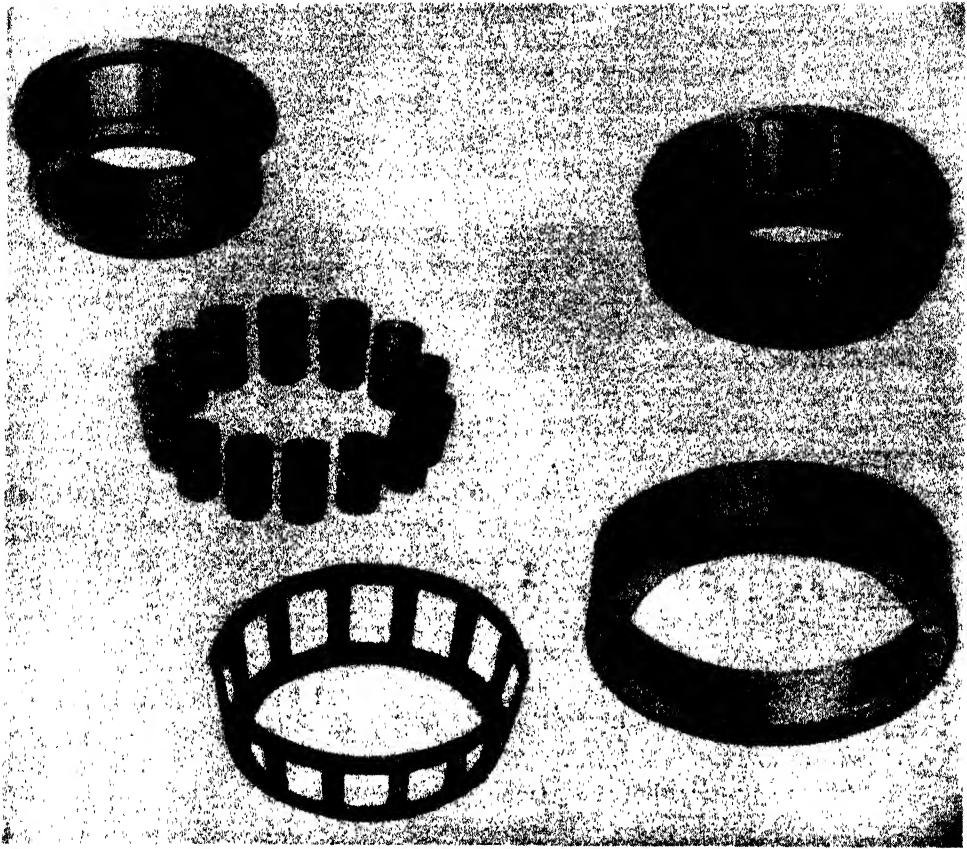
B. (Courtesy, Timken Roller Bearing Co.)
